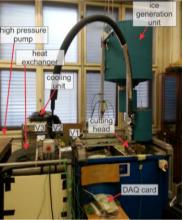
The experimental setup, showing the major components of the IAWJ prototype.
